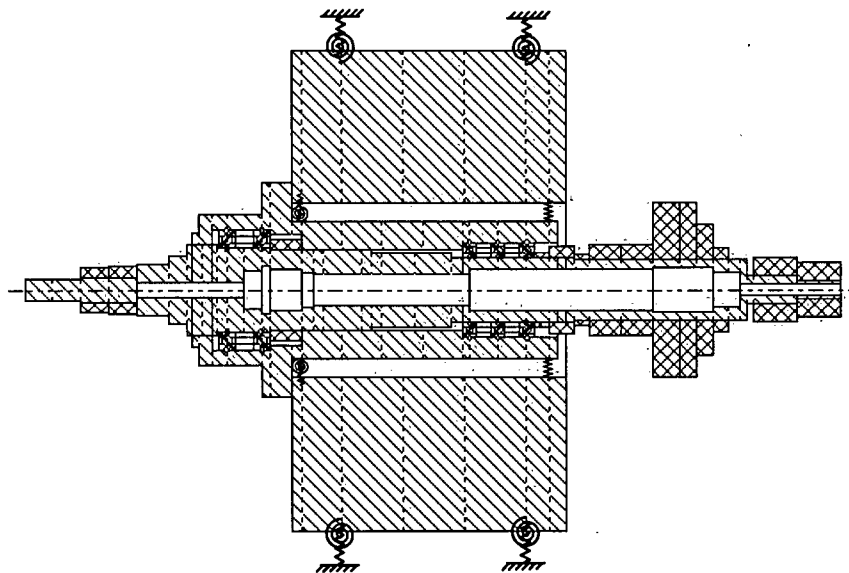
FE model presented in SpindlePro® for the spindle machine tool system
